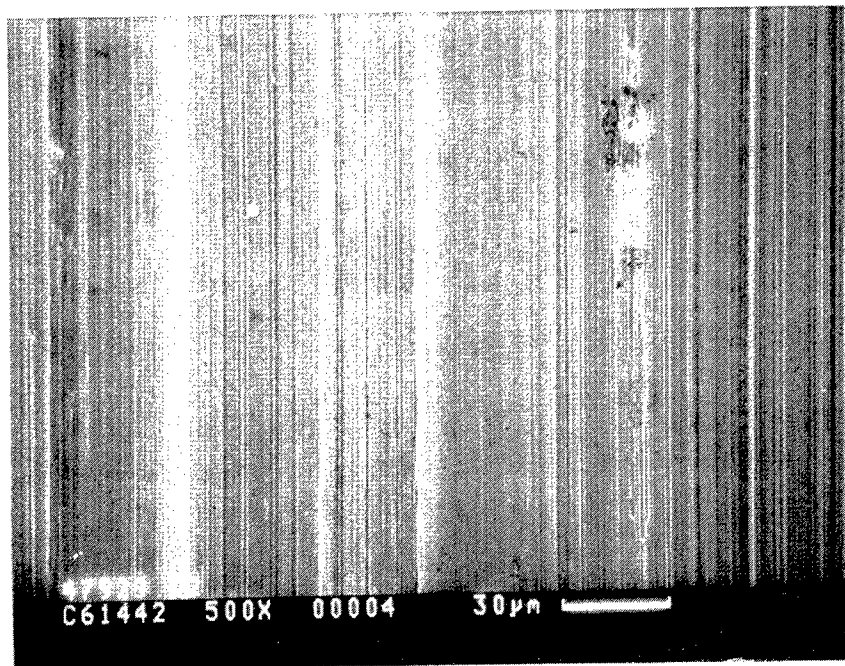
500X photograph of broach machining marks in a turbine disk attachment slot.
